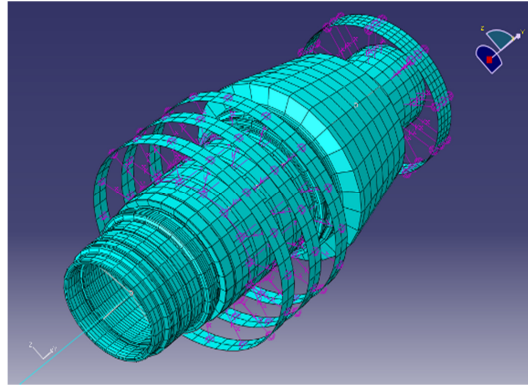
Full meshed FE model of the pinion gear with non-linear springs
